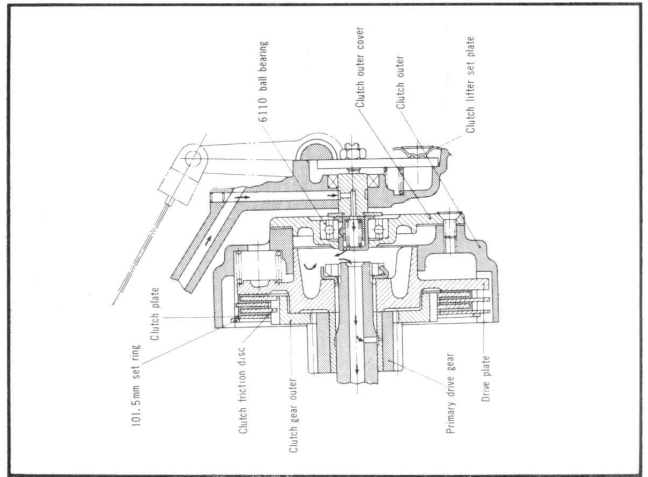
A. Clutch assembly and oil passage diagram S50, S65
